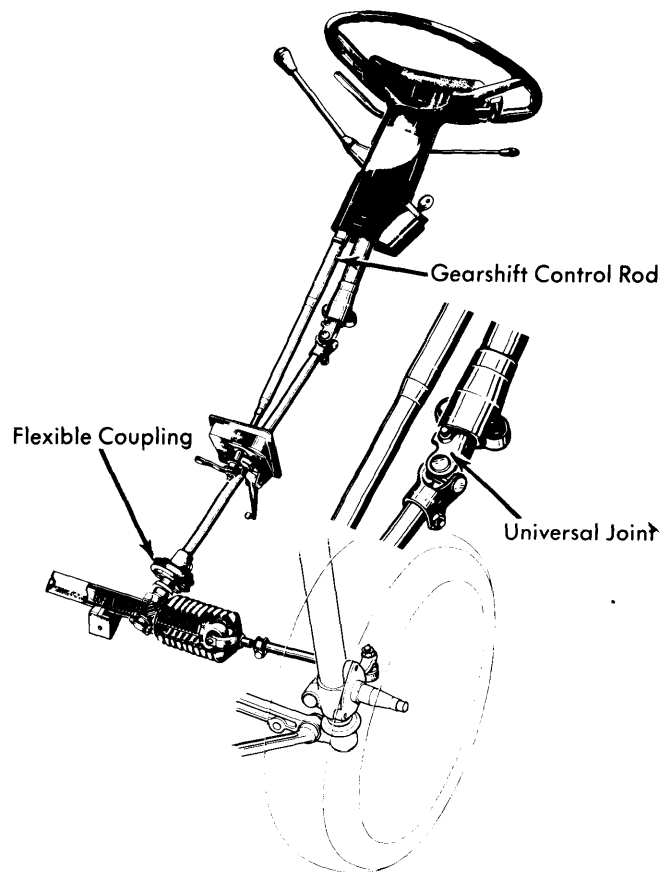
Steering Column Assembly with Detail of Universal Joint
